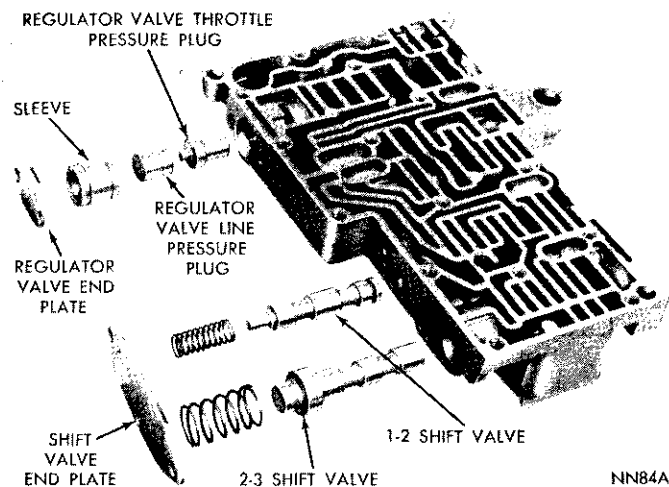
Valve Body—Shift Valve Side—Disassembled
